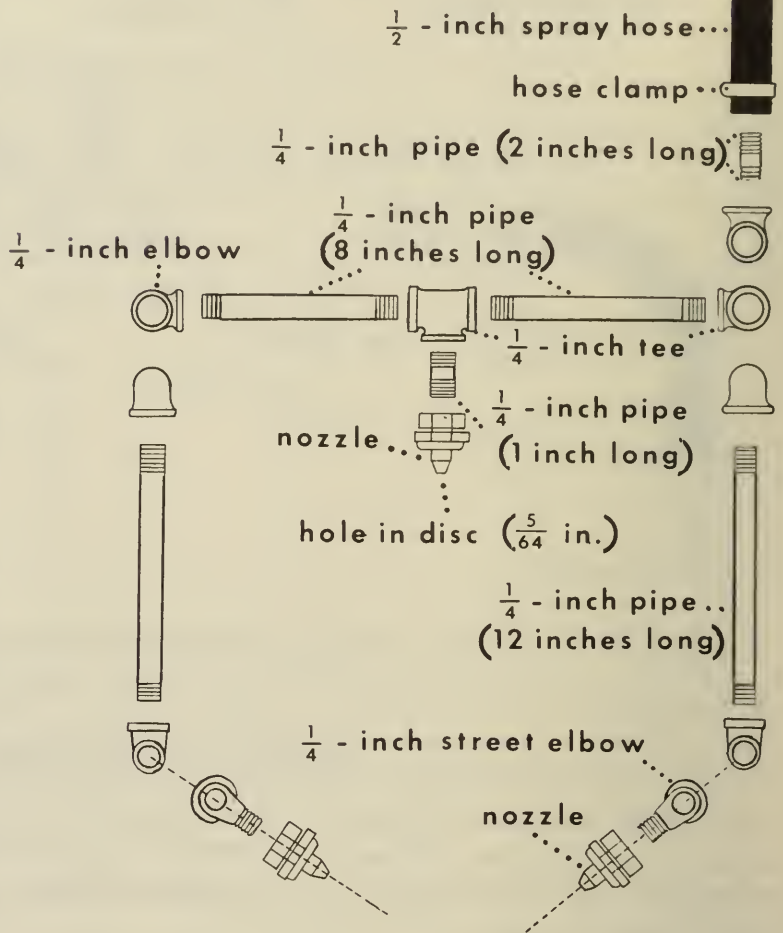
Spray boom for row crop sprayer, showing exploded view of parts required to make 3-nozzle boom with $\frac{1}{4}$ -inch galvanized pipe.
